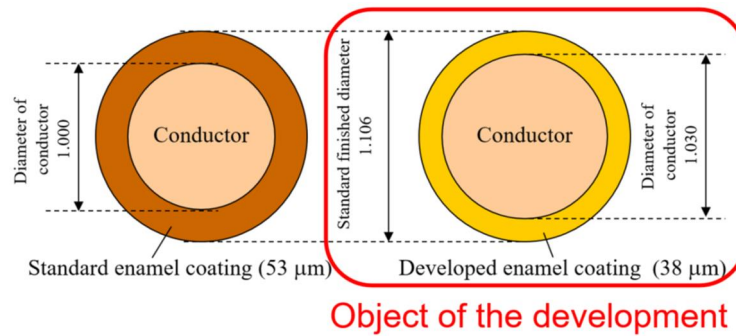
Cross-sectional view of enamel wires for small- and medium-sized rotating machines
